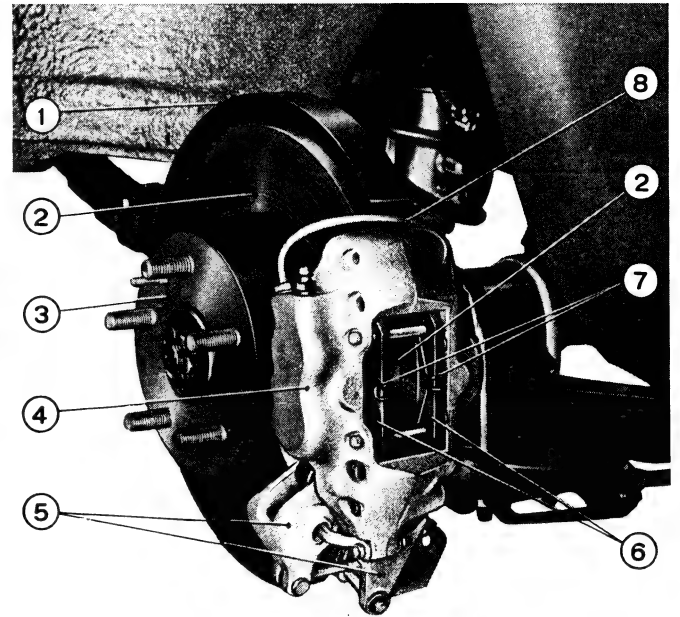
Left rear wheel disc brake - 1600 S Cabriolet.
